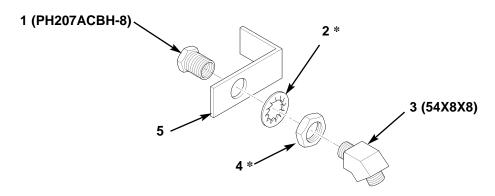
Connecting Tube to Relay Valve and Left-Rear Modulator.
